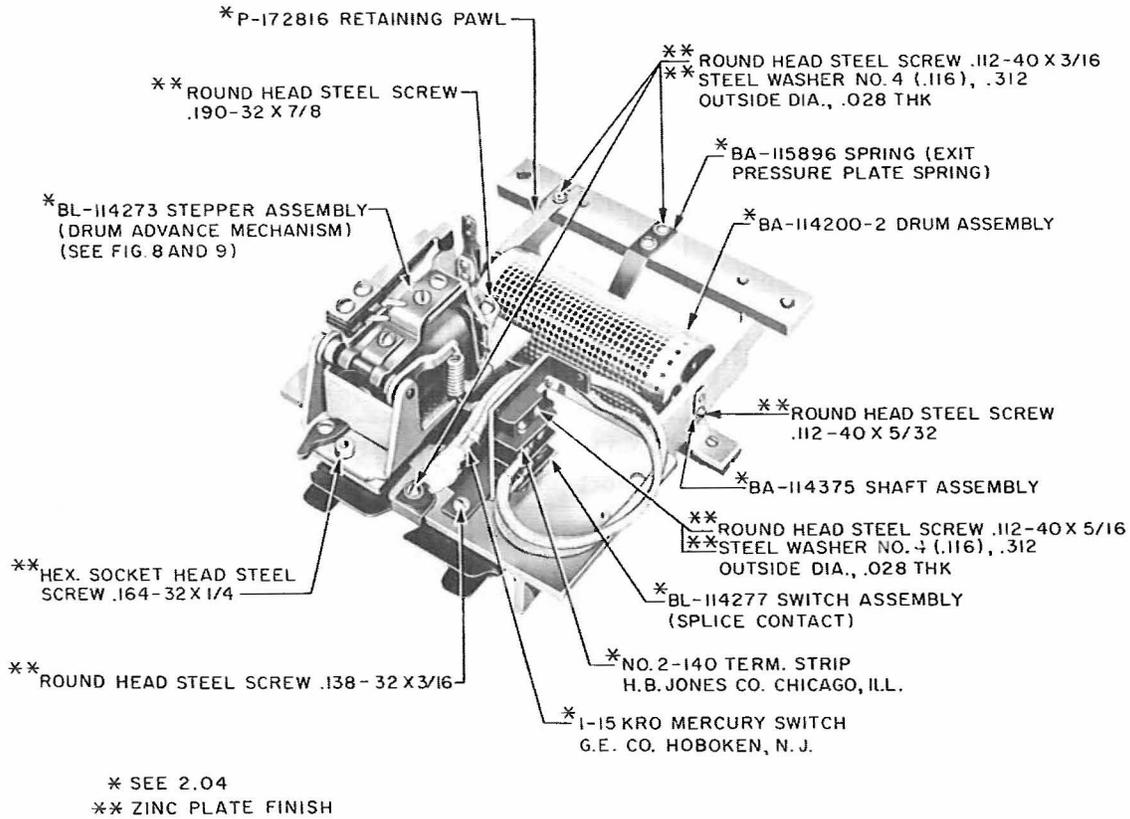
Cradle Assembly — Bottom View — D-176283 Perforator
